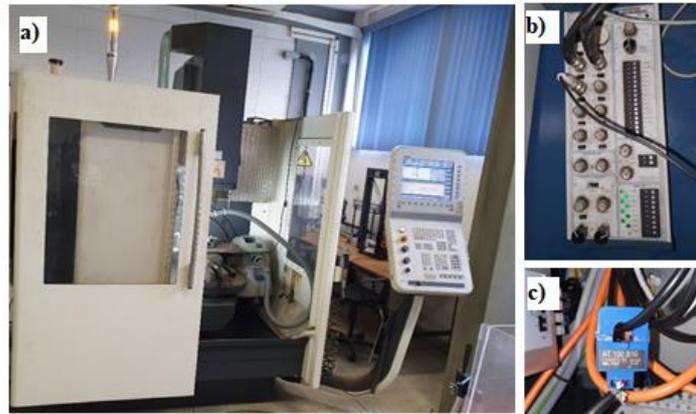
Experimental testing. a) Machining center; b) Acquisition system PCI BNC-2120 and c) Power consumption sensor.
